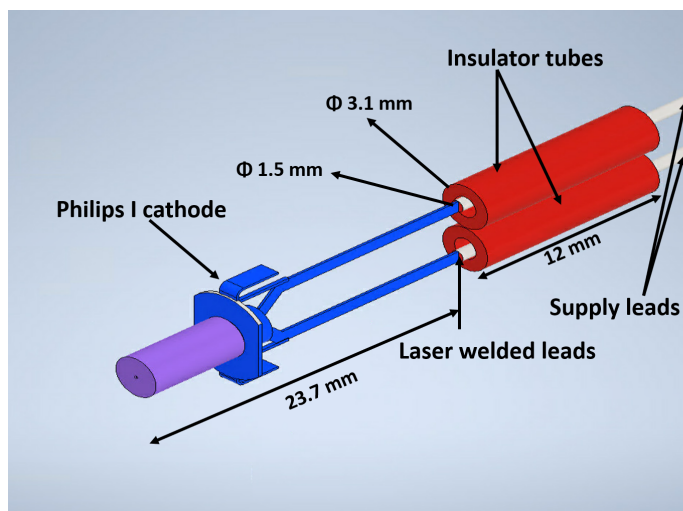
CAD illustration of evaporator connected to the supply leads through insulator tubes.
